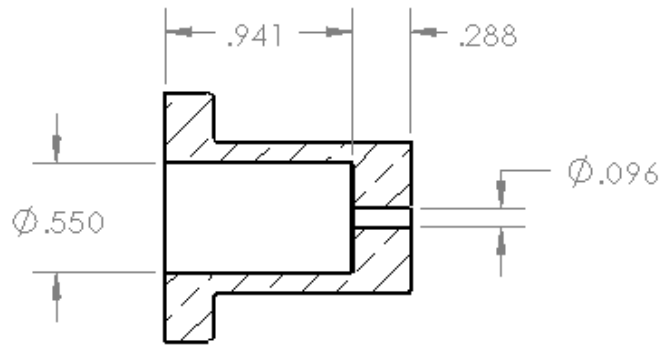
Schematic of the '3S' nozzle (all dimensions are in inch)
